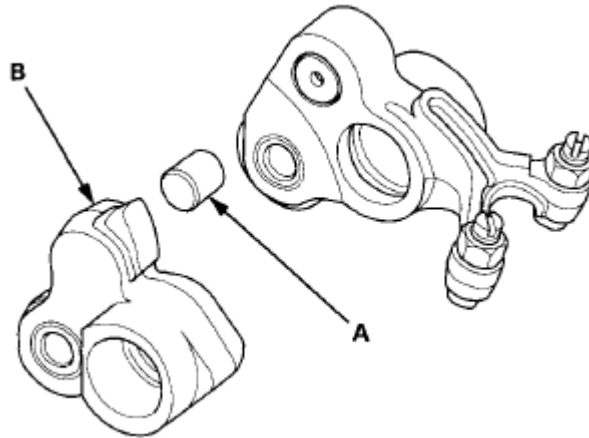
Identifying Rocker Arm Piston And Intake Secondary Rocker Arm
